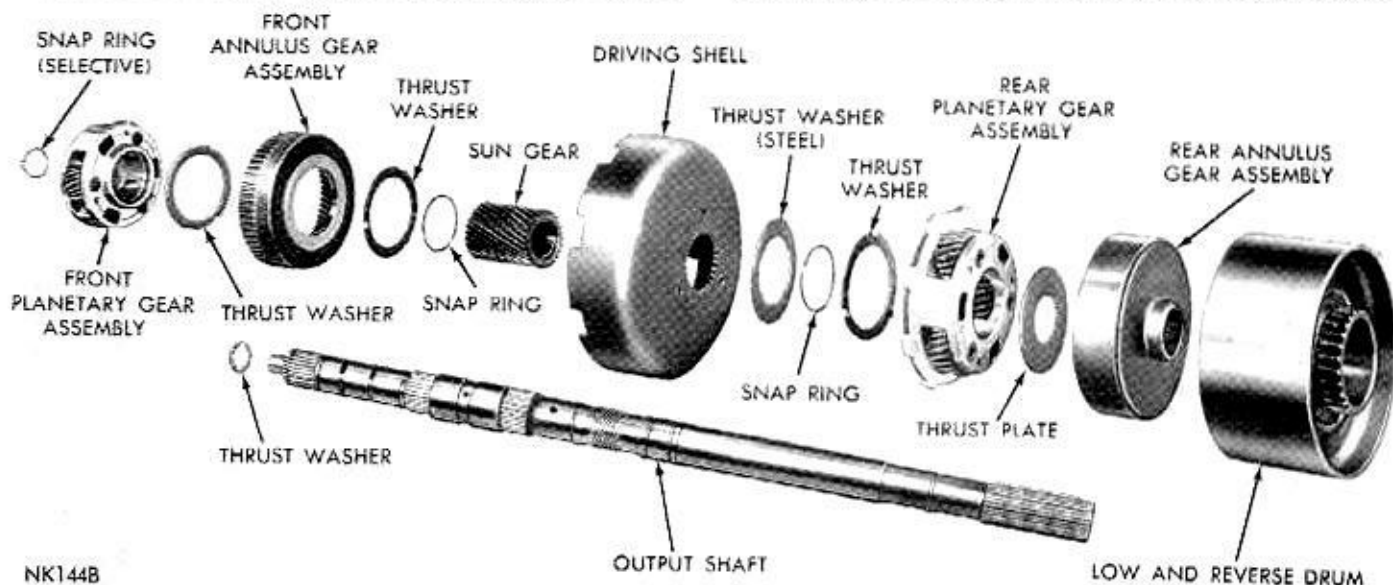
Planetary Gear Train and Output Shaft Disassembled (A-727)
